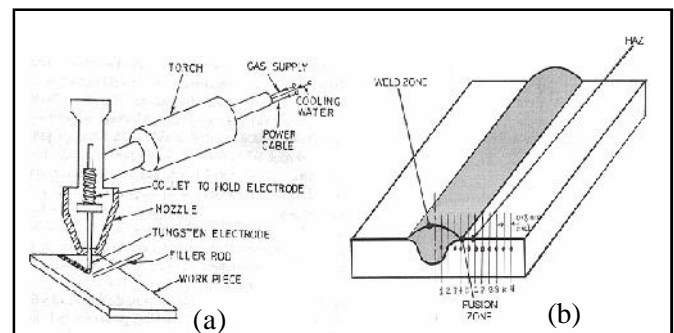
Systematic diagram of experimental setup of PULSE GTAW Welding on Aluminum Alloy 7039
